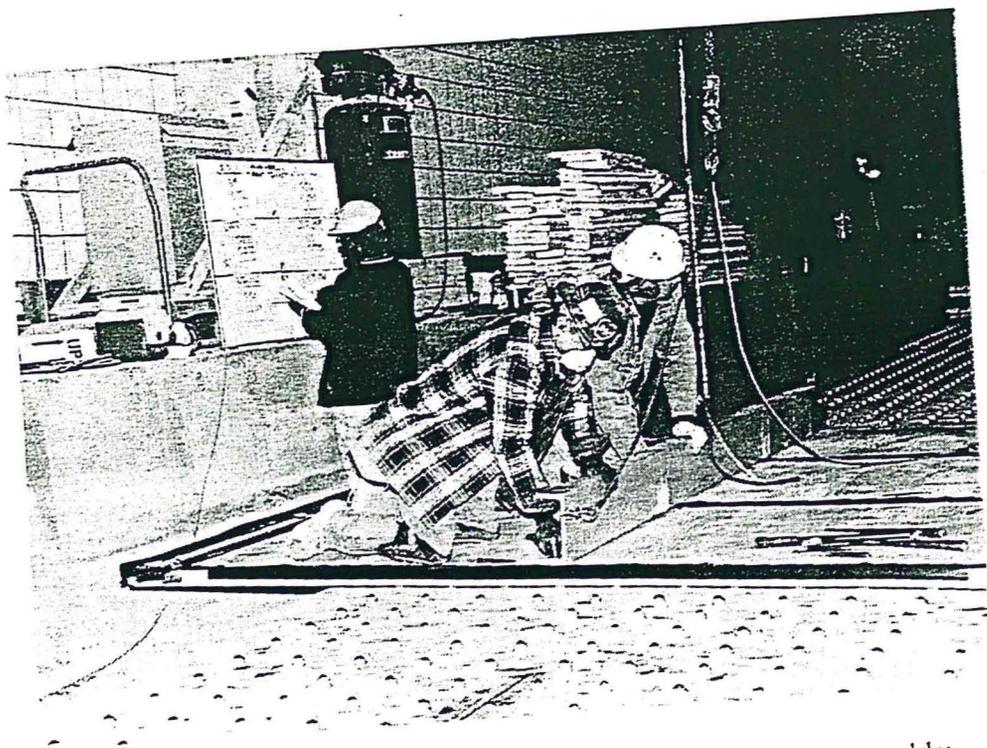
Aligning the I-beam with the pins during sub-module assembly.
